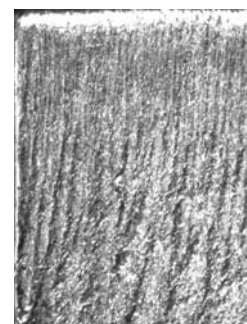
The character of the surface made by waterjet with pressure 0,9 GPa (material – aluminium $b = 15 \text{ mm}$)
